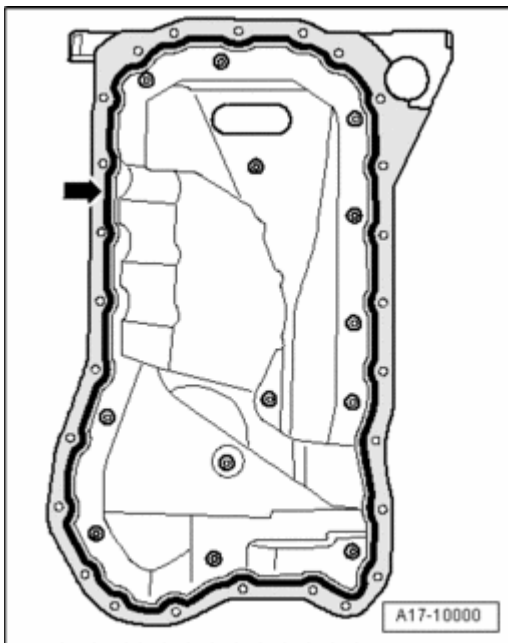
Applying Bead Of Silicone Sealant Onto Clean Sealing Surface Of Sump
